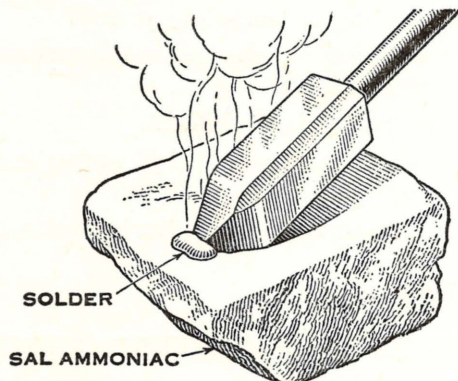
Using a block of sal ammoniac to tin a soldering copper
